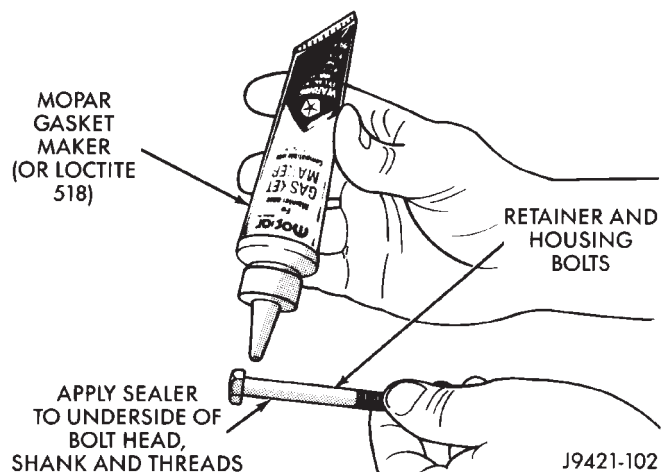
Applying Sealer To Retainer And Housing Bolts
